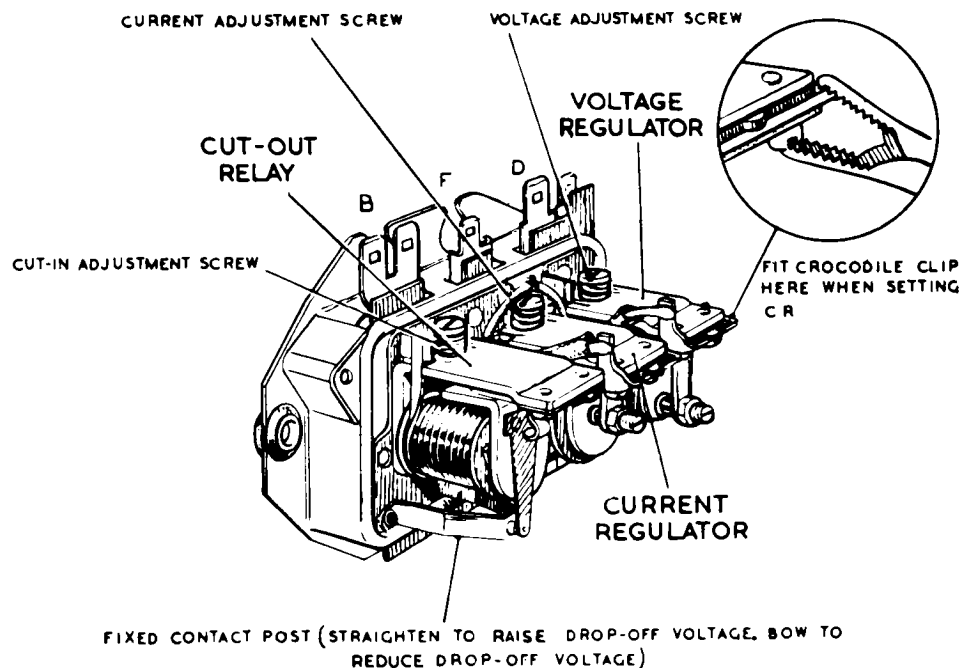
The RB.310 control box showing the position of the three spring loaded adjusting screws.
